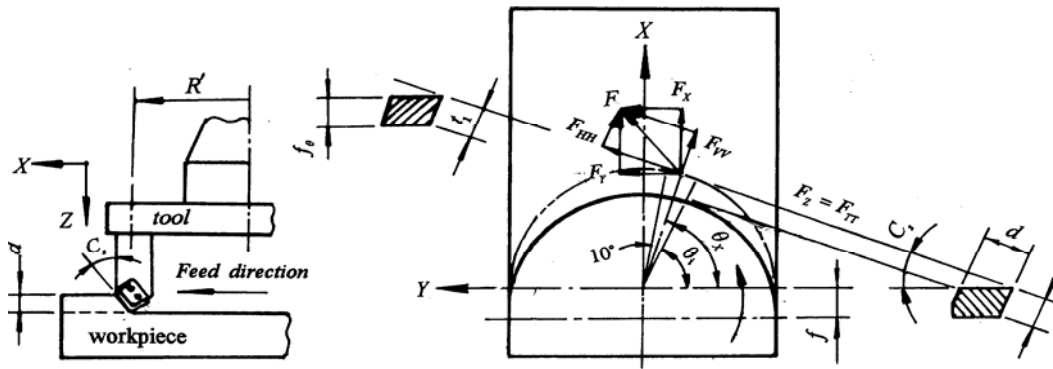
cutting forces model with face milling and cutting geometric relationship
